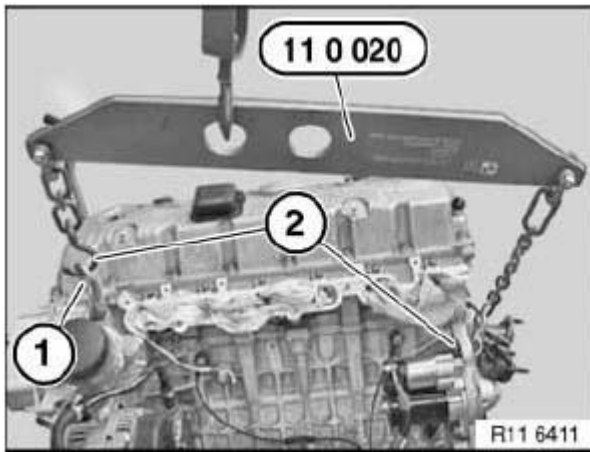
Identifying Special Tool (11 0 020), Towing Hook And Engine Mounting Eyelets
